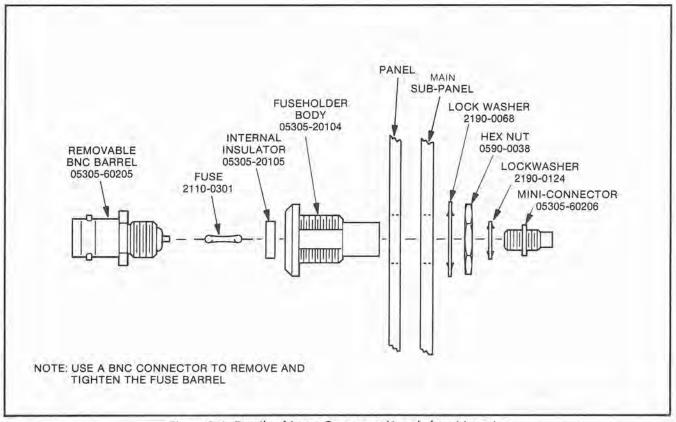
Details of Input Connector J1 and fuse Mounting
